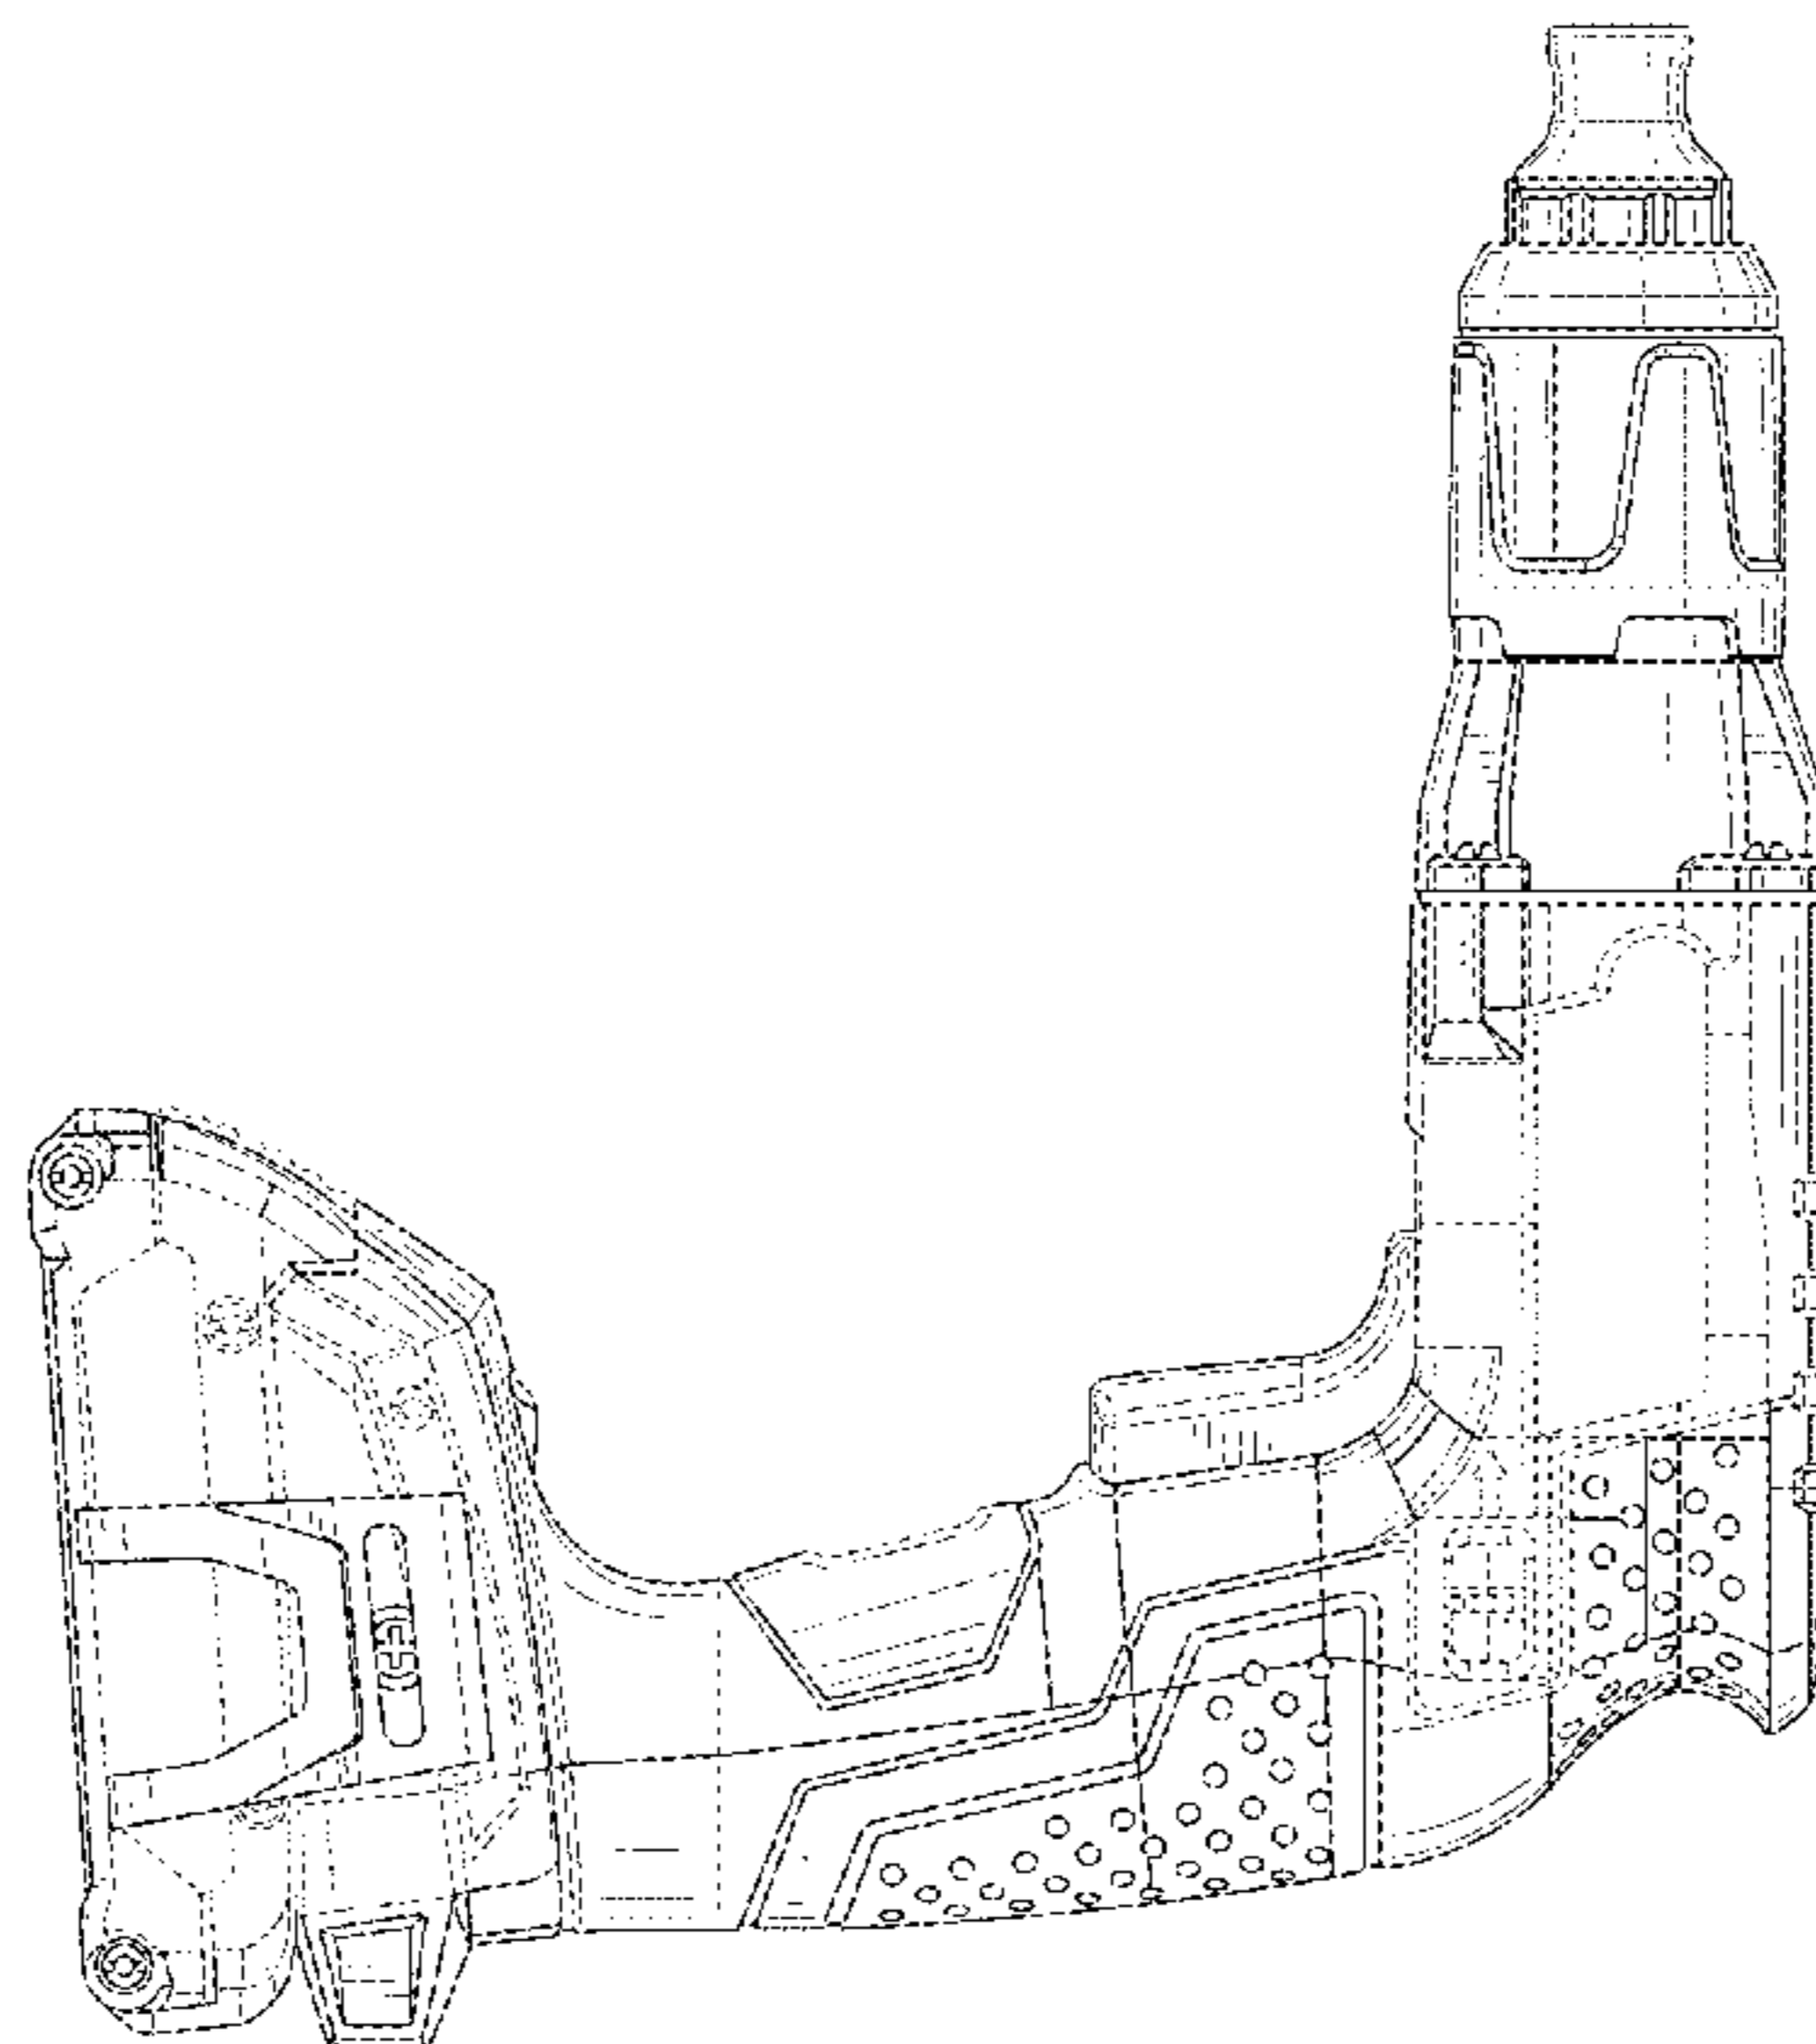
is a top plan view showing the design for the screwdriver of FIG. 1;
